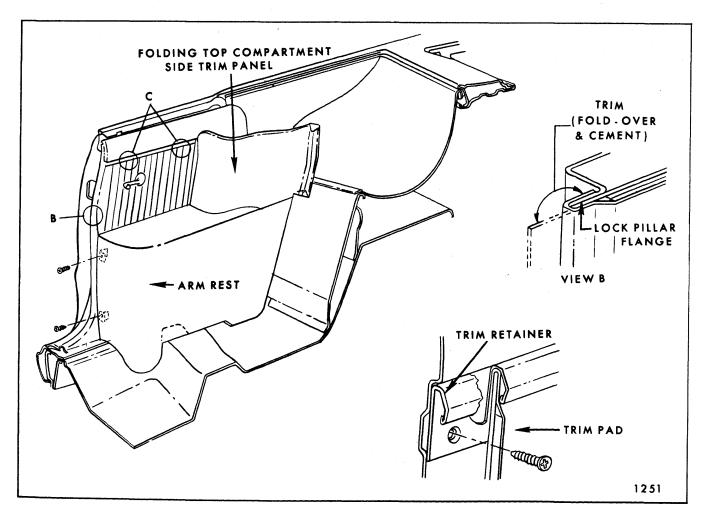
Rear Quarter Trim Assembly - Convertible Styles
